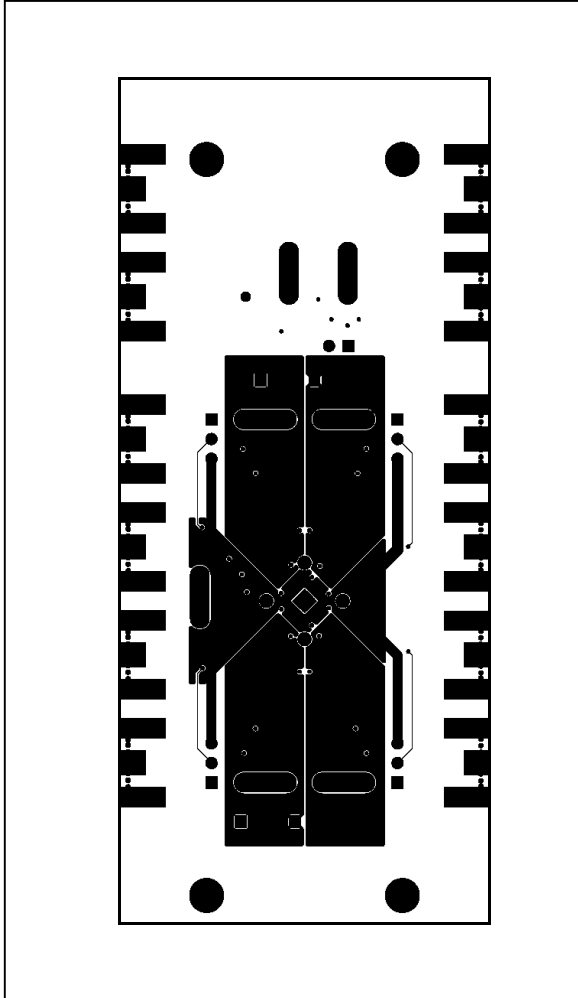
MAX3841 EV Kit PC Board Layout—Solder Side
